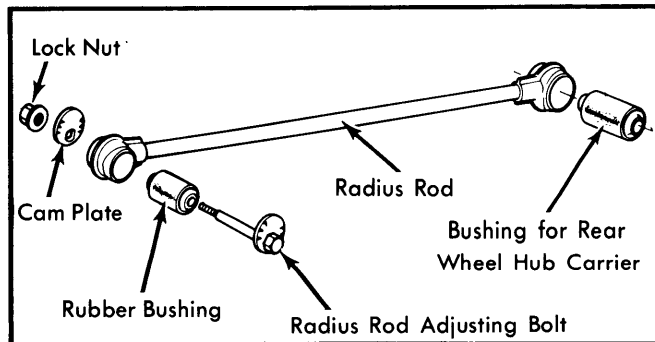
Radius Control Rod with Bushings and Adjustment Bolt – Accord Shown Others Similar
